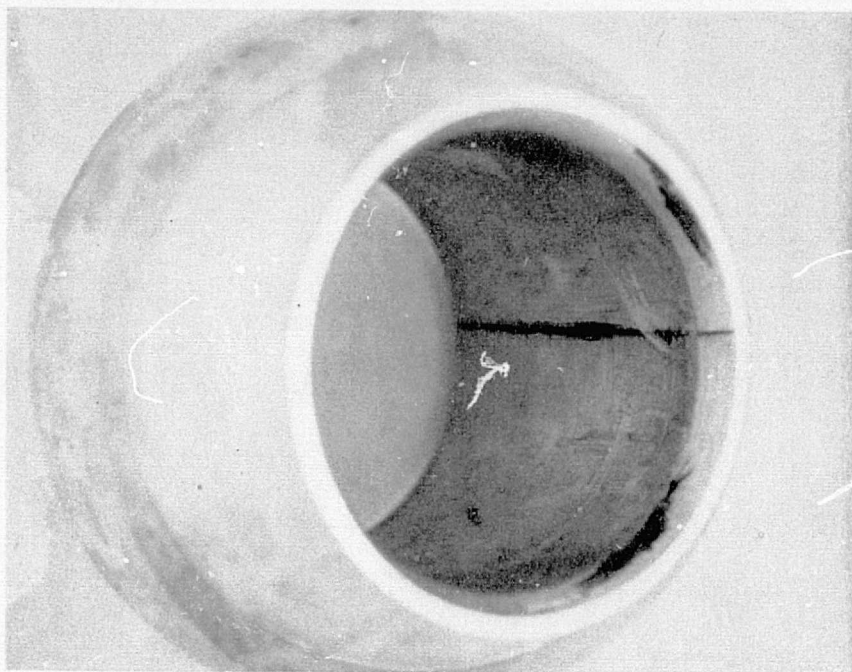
Design A Ball No. 19, Showing Failure Which Did Not Progress to Ball Outer Surface. (Crack is accentuated with Magnaflux Solution)
